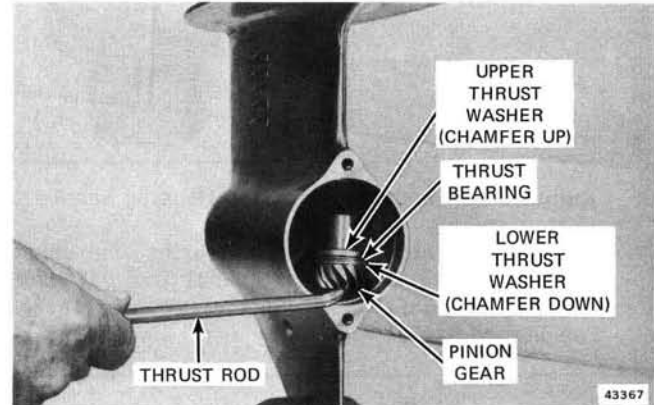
Installing Pinion Gear, Thrust Washers and Bearing
